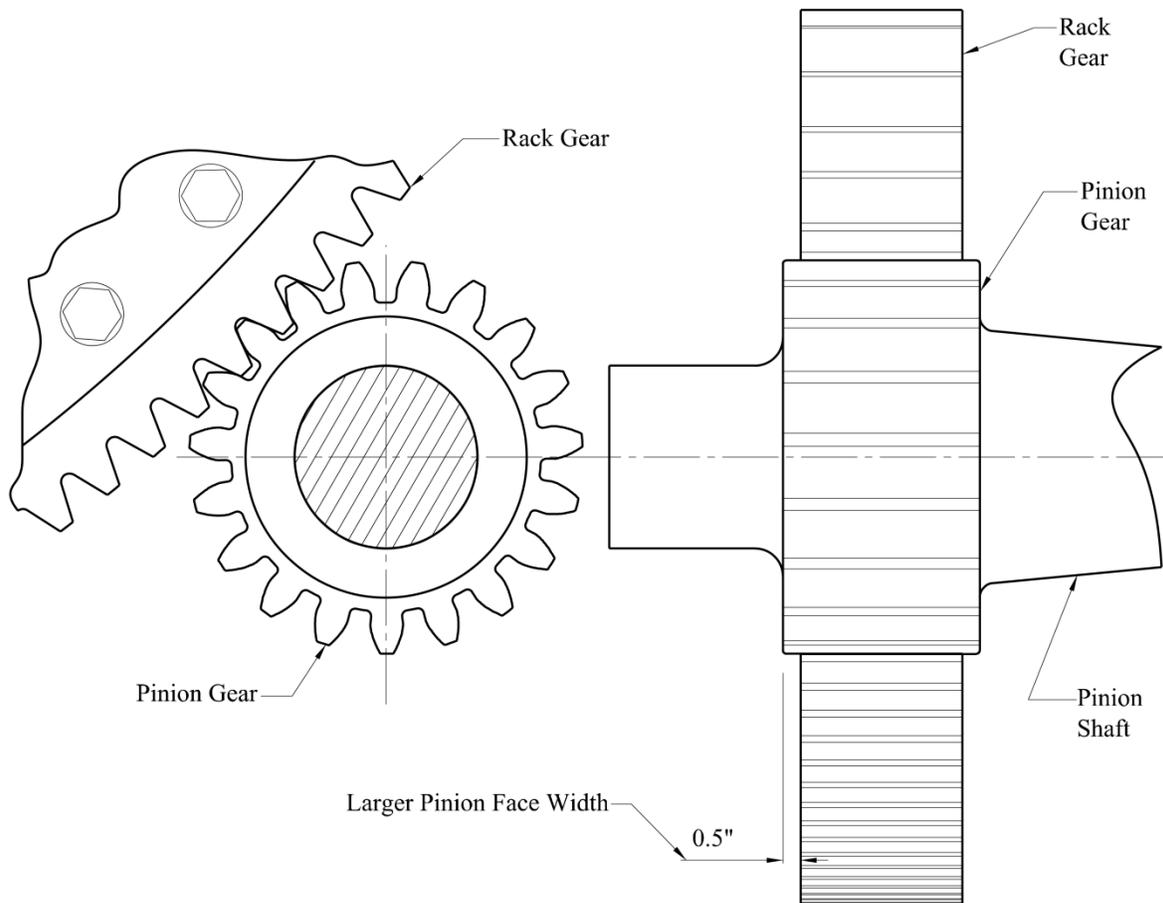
Pinion and Ring Gear Assembly - Tower Drive Vertical Lift Bridge
